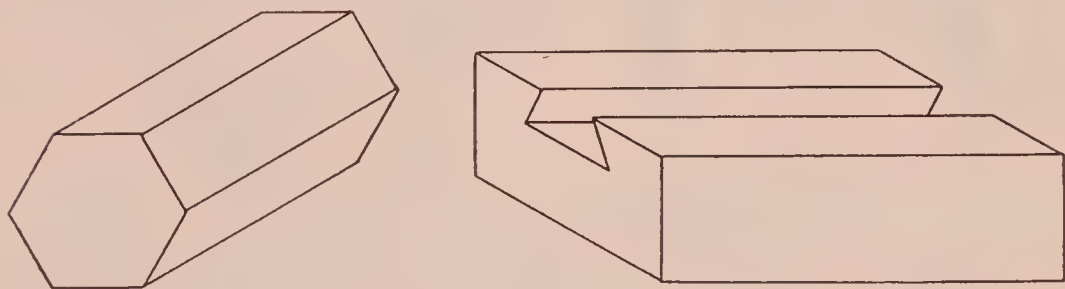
Oblique projections of a hexagonal bar and a dovetail slide.
